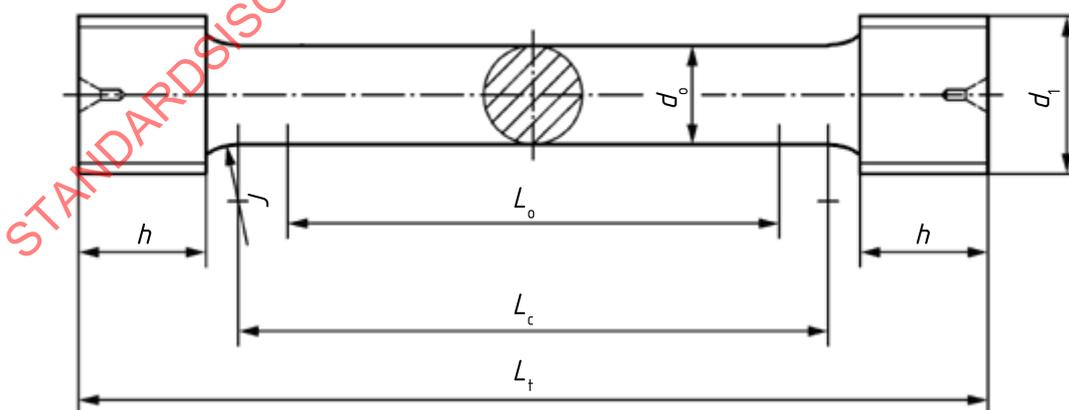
Schematic illustration of a round test piece and of the dimensions^[7]
